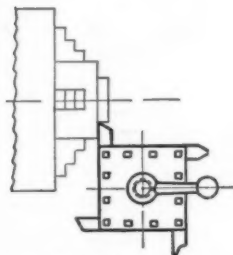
Side of tool is used to take a 1" deep broad-face cut.
